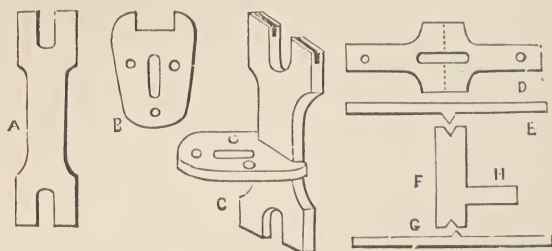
PATTERNS OF CASTINGS FOR TREADLE MACHINE.
